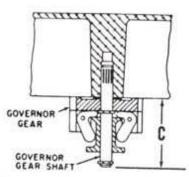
Governor gear and shaft installation on Models VH80 and VH100. Dimension (C) is 1 inch {25.4 mm}.
